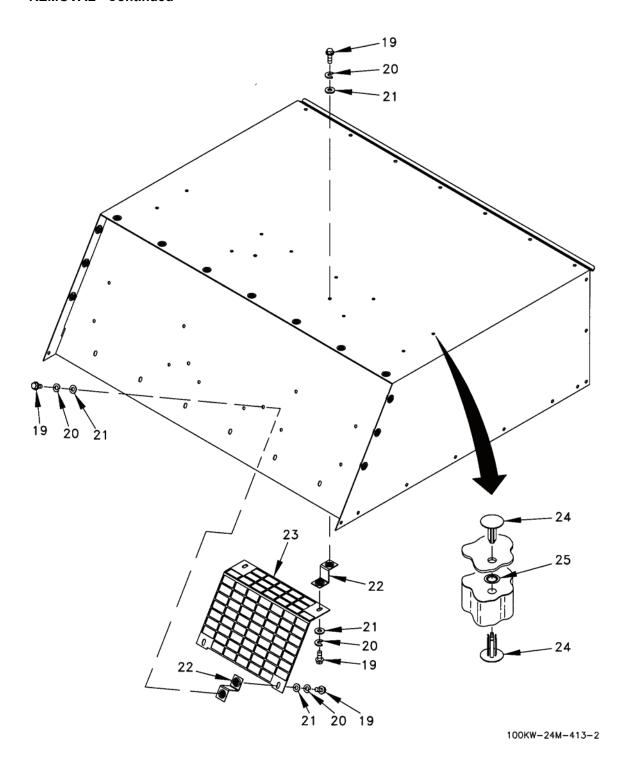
Rear Roof Section Housing Assembly (Sheet 2 of 2).
